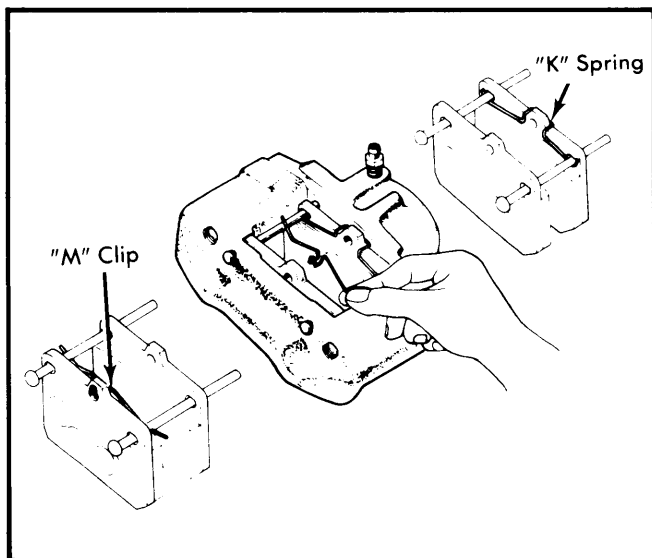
Installing Spring and Clip on Brake Pads (Champ & Colt)
